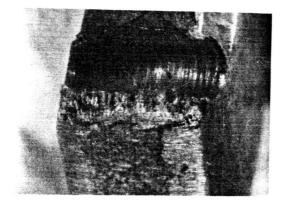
Fracture Surface with Sheared Edge, Untreated Steel, Transverse Specimen
